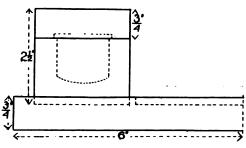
SIDE VIEW OF ONE OF THE INK
